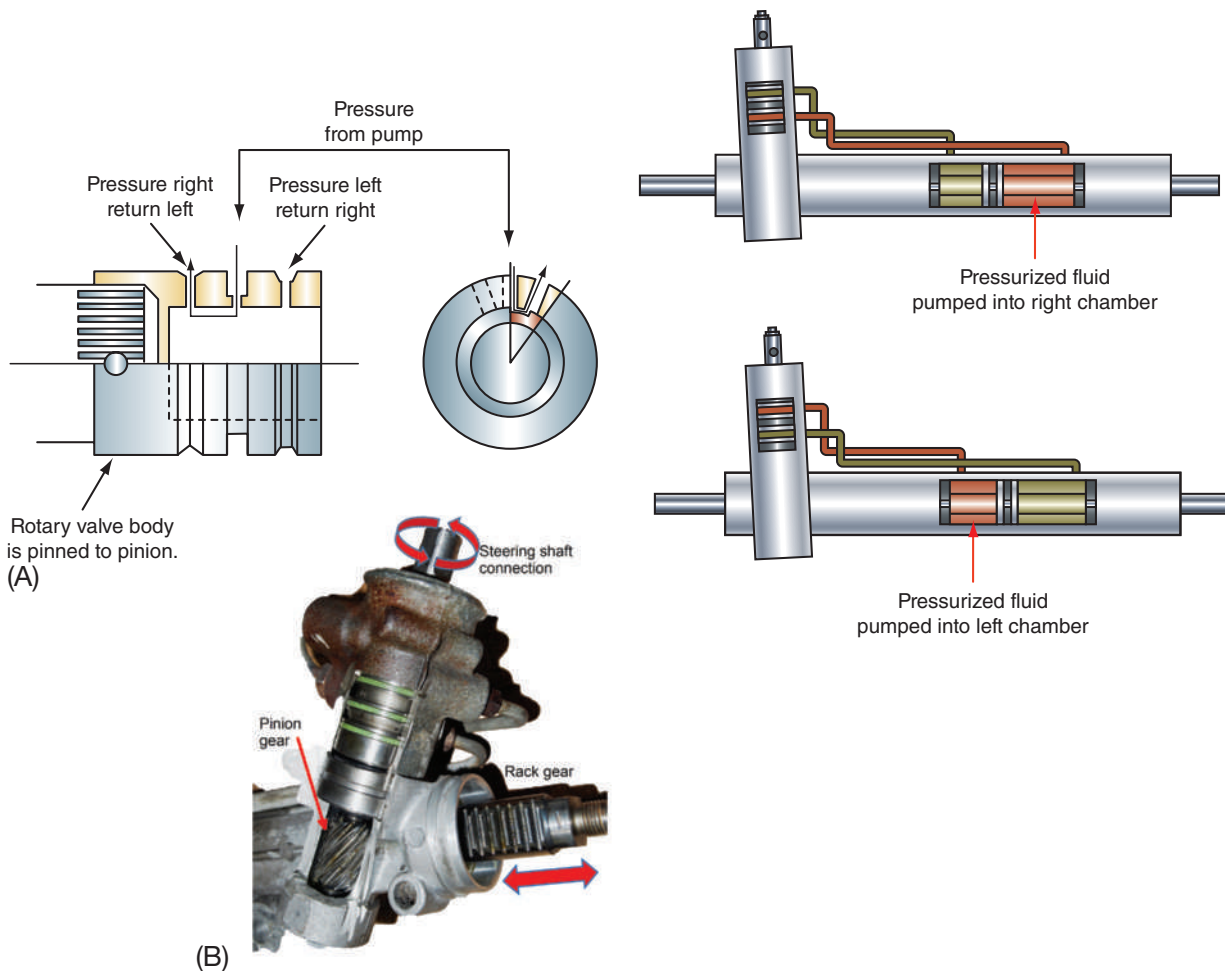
(A) A power-steering piston and cylinder for a rack and pinion steering gear. (B) The assembly that connects the steering wheel to the rack and pinion assembly.
